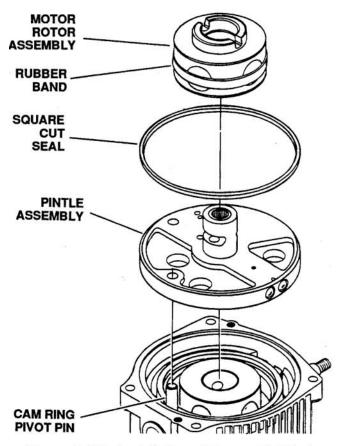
Installation of Square Cut Seal and Rotor Assembly
